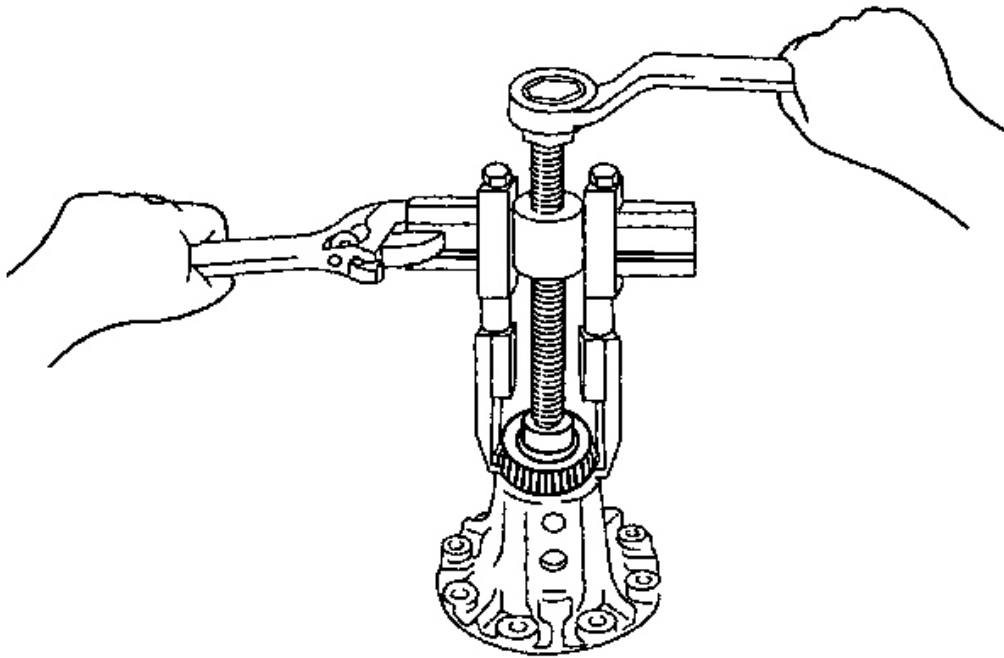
Removing Tapered Roller Bearing & Transaxle Housing Side Using A Puller
